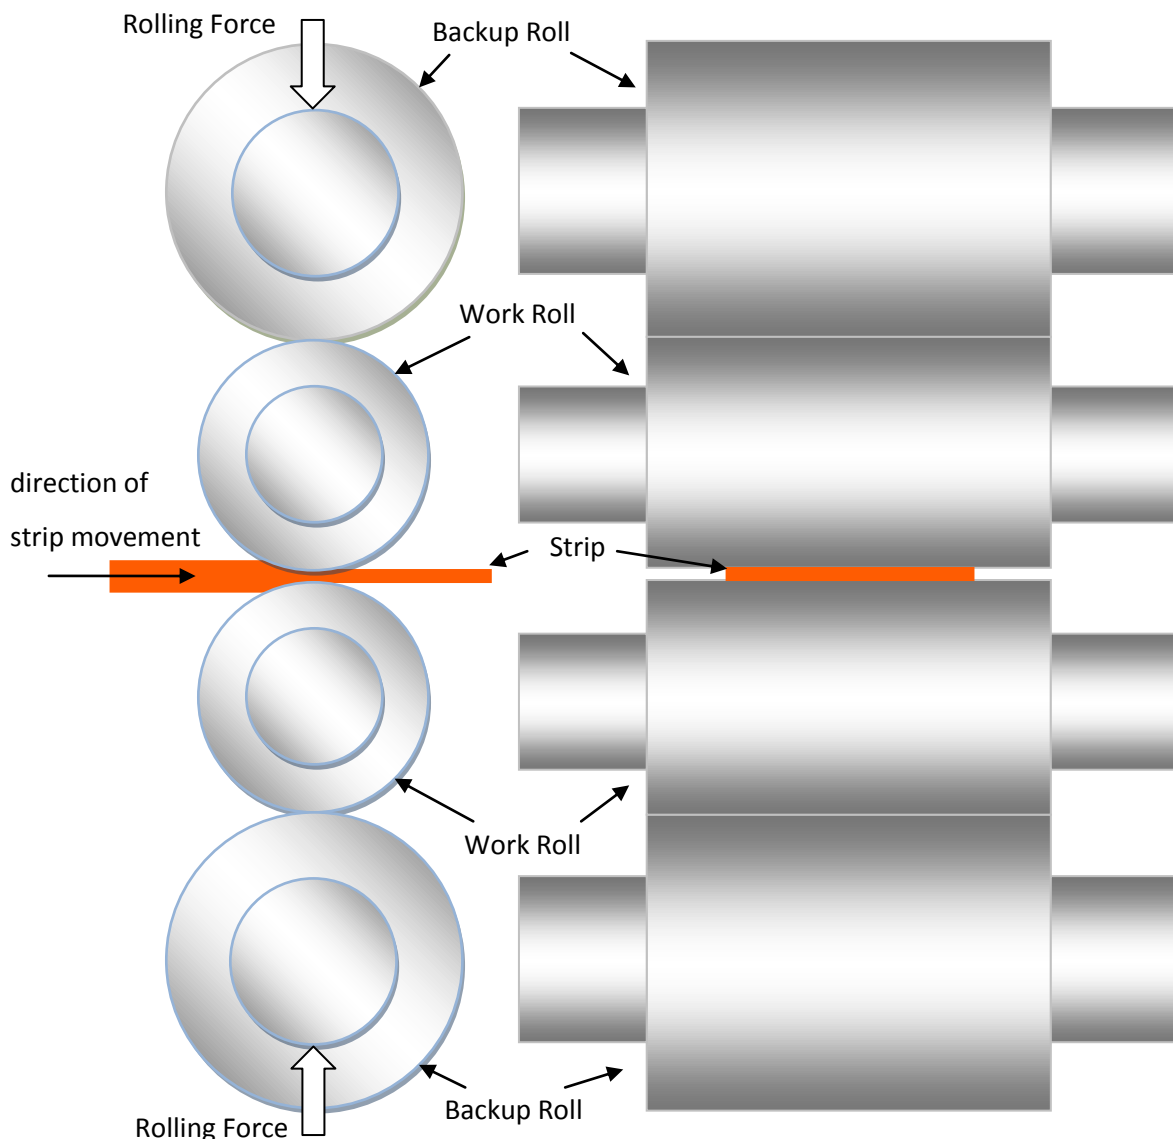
Basic roll layout in a single hot rolling stand; left – side view, right – front view.
